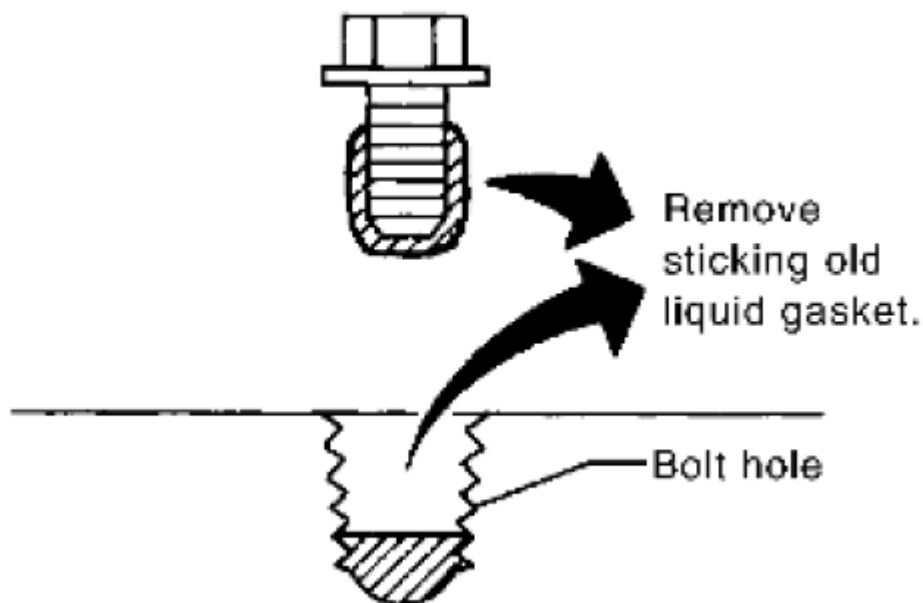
Removing Old Liquid Gasket From Bolt Hole And Thread
